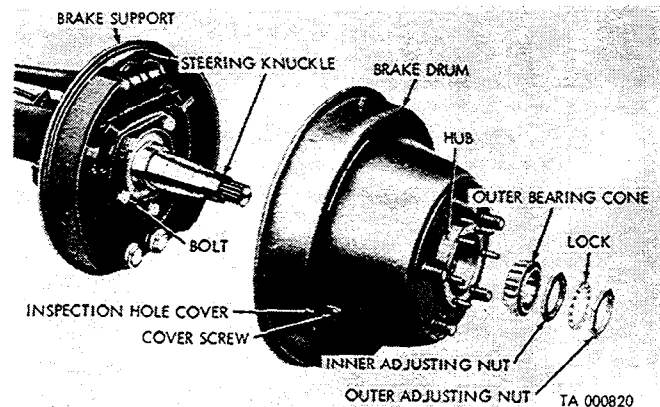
Front wheel hub and drum and related parts—exploded view.
